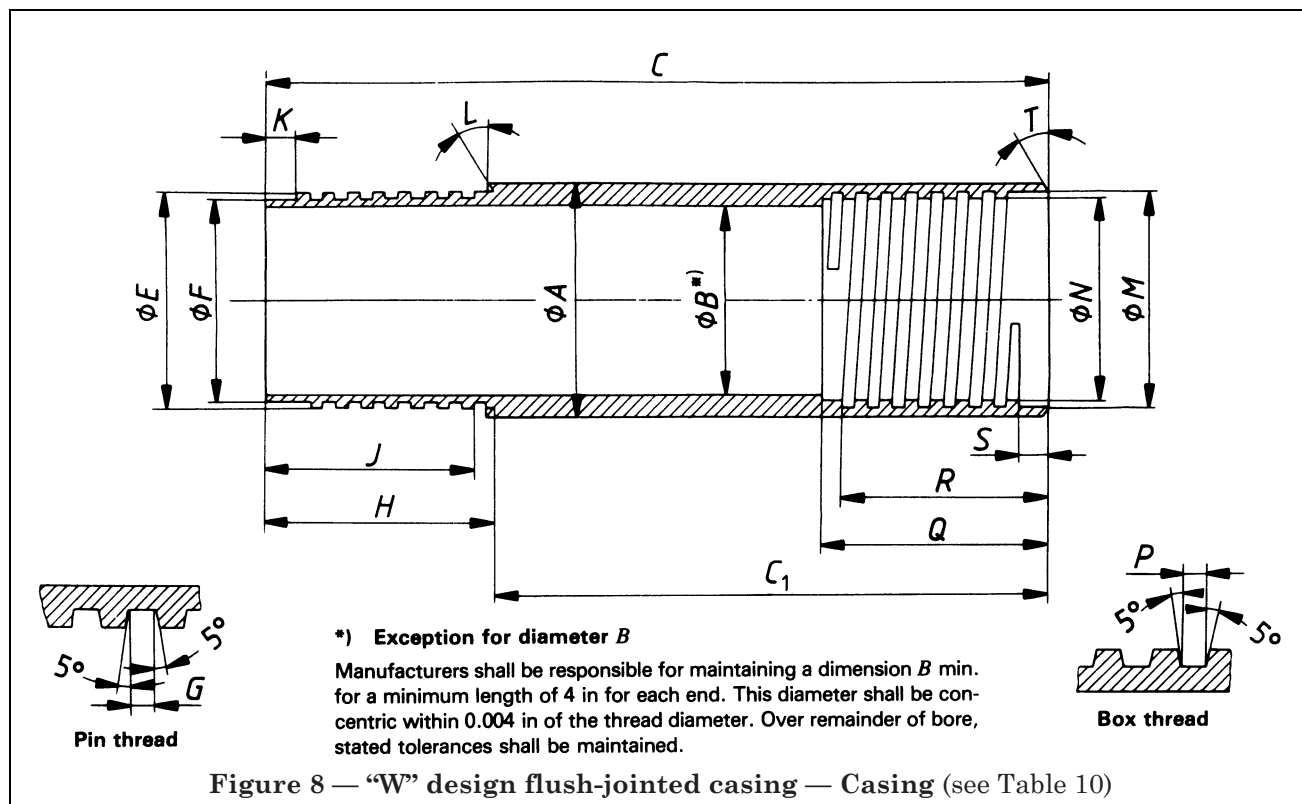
"W" design flush-jointed casing — Casing (see Table 10)
